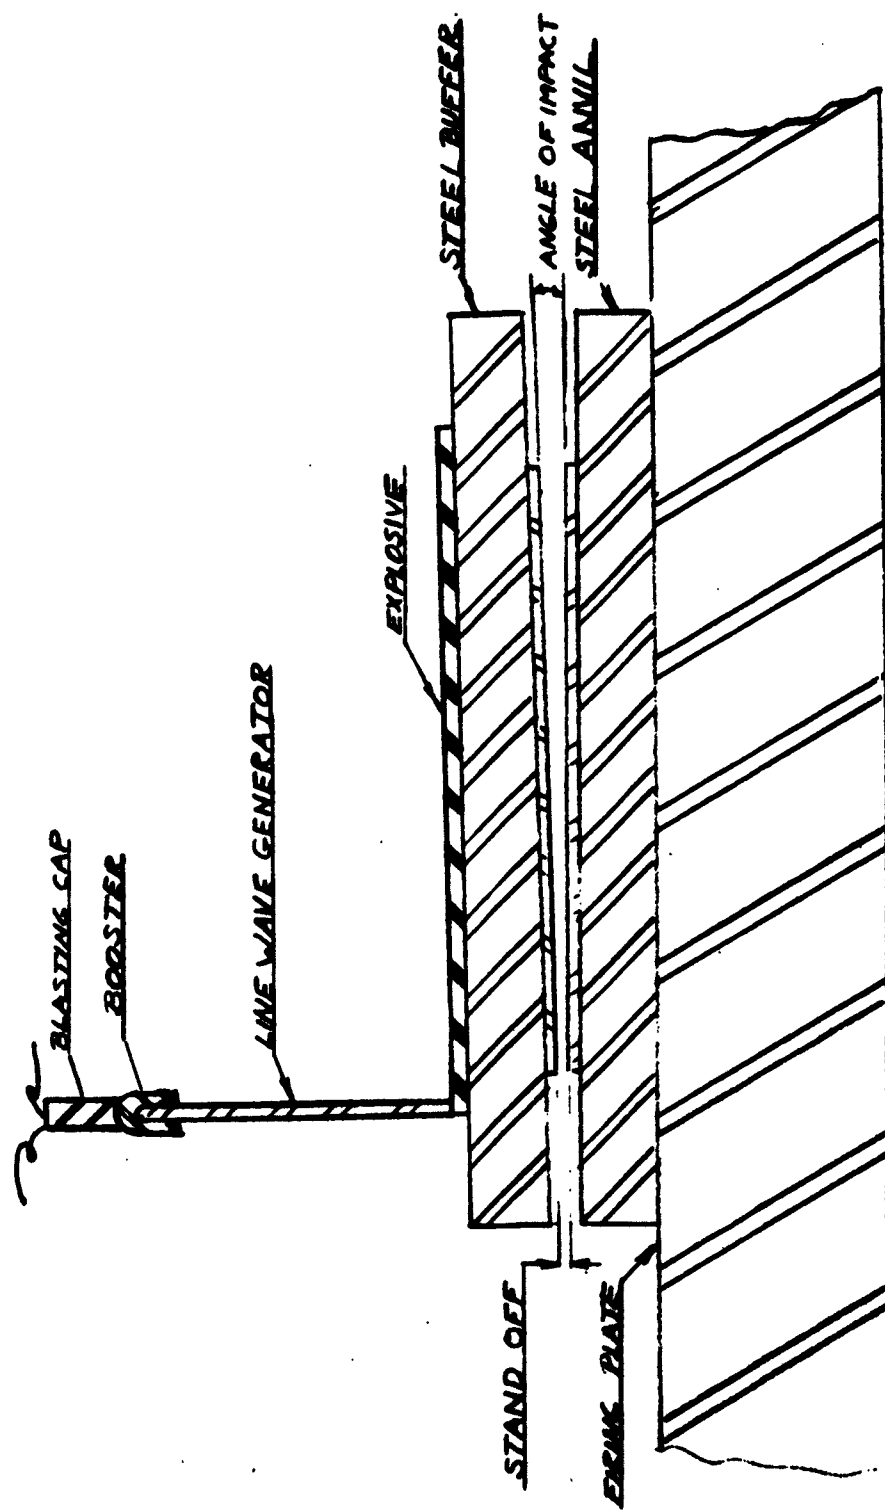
Explosive Weld Test Assembly with Angle of Impact
